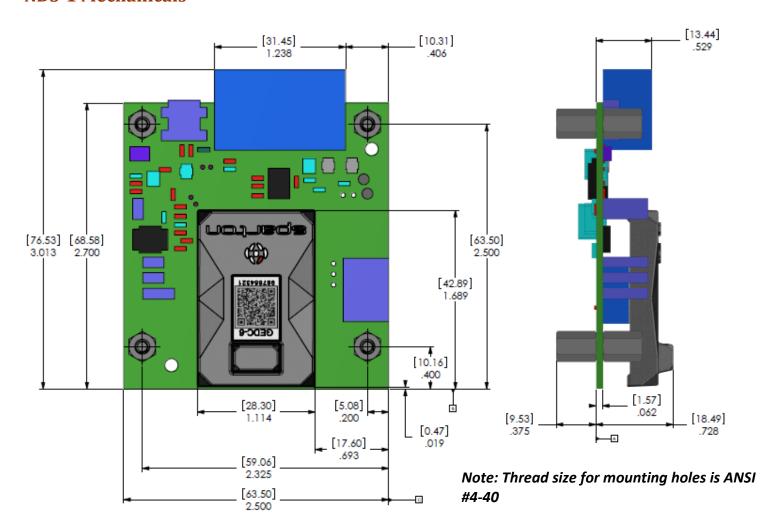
NDS-1 ADAPTER BOARD MECHANICALS
